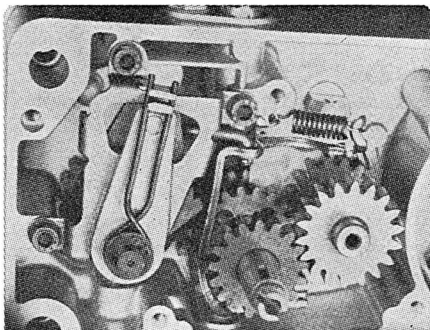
View of 4-speed transmission assembled in the left half of crankcase.
